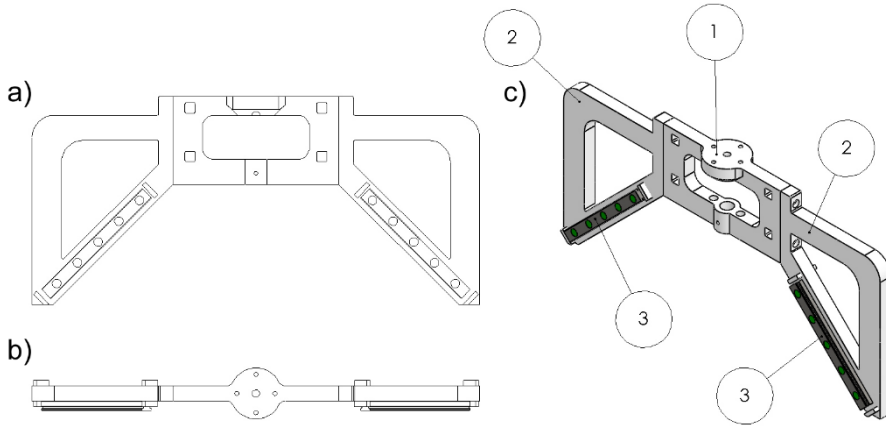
Crosshead sub-assembly composed by 1) Connector, 2) Lateral extensions, 3) Linear guideway rails: a) front b) top and c) isometric view.
